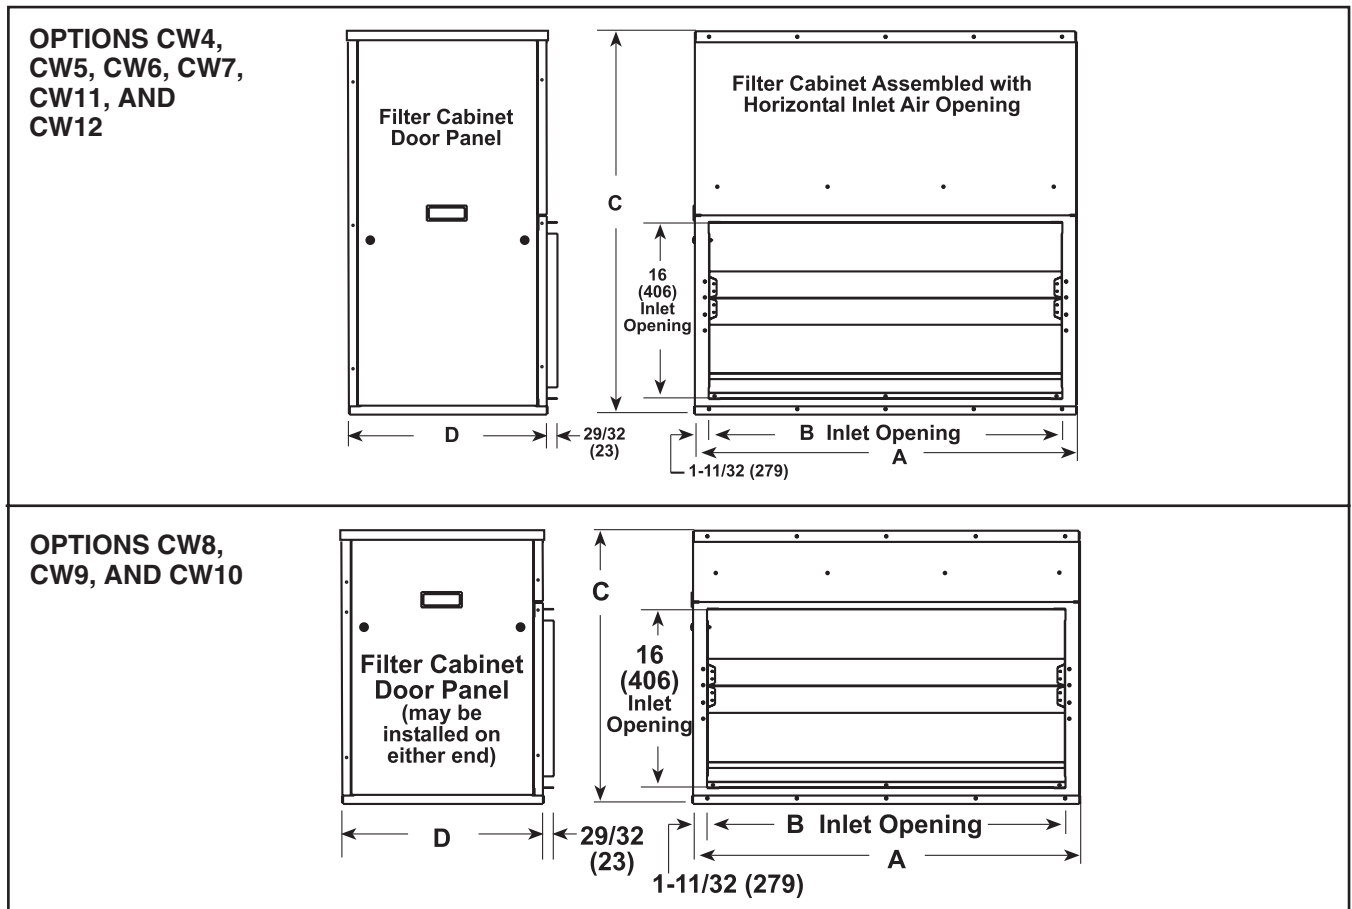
Rear Inlet Cabinet Dimensions (Refer to Table 3)
